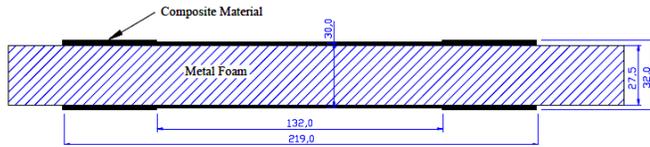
Cross section of hybrid metal/composite component: cylindrical core in aluminum foam and outer shell in Epoxy/S2-Glass (dimensions in millimeters). [13]
